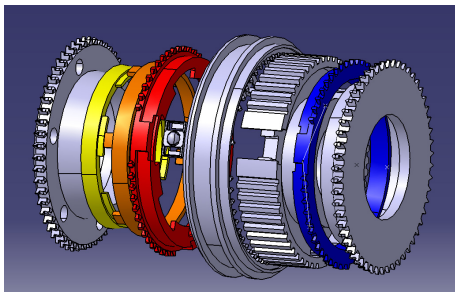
CAD model of triple-cone and single-cone synchronizer and clutch body gears
